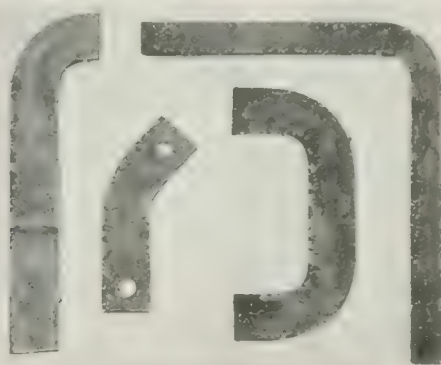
COPPER STRAP BENT ON THE BENDING MACHINE SHOWN IN FIG. 6
